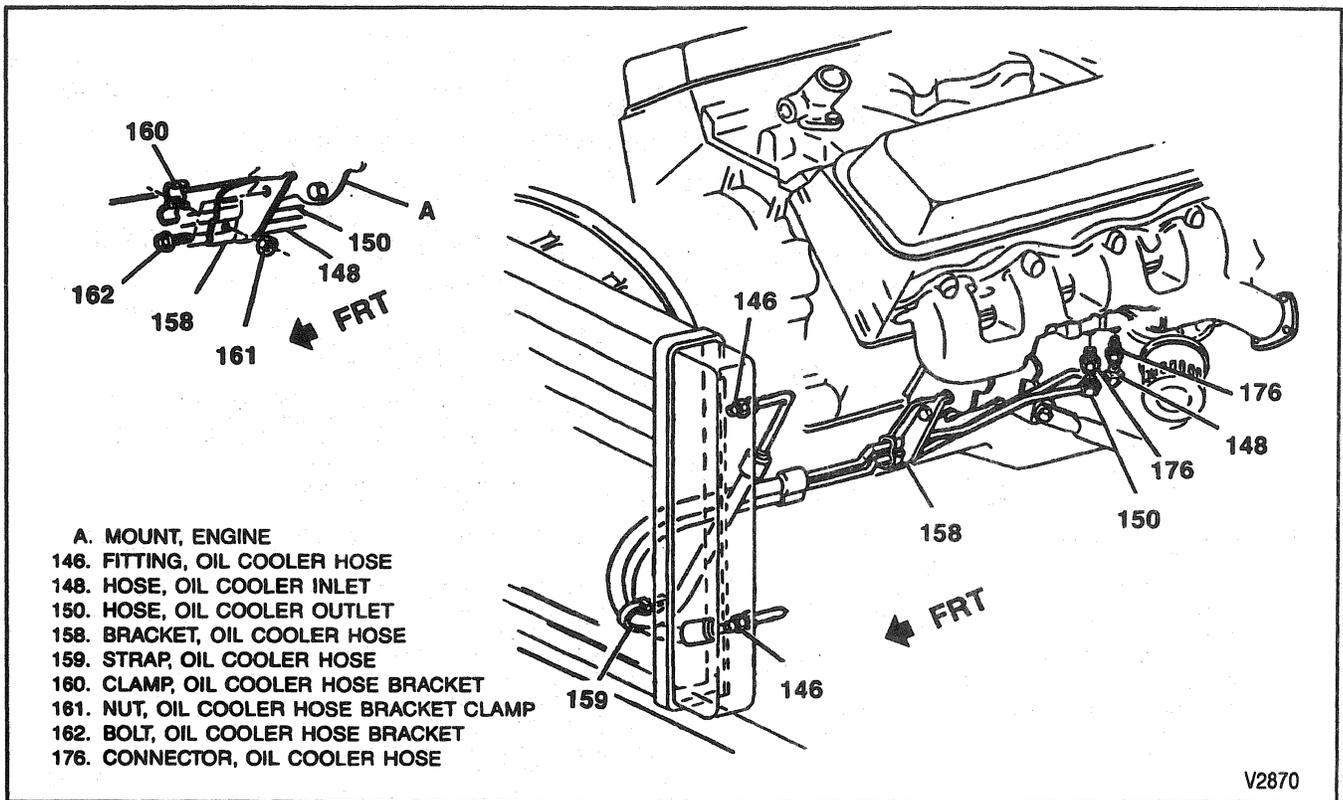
Engine Oil Cooler Lines and Components (7.4L Engine)
